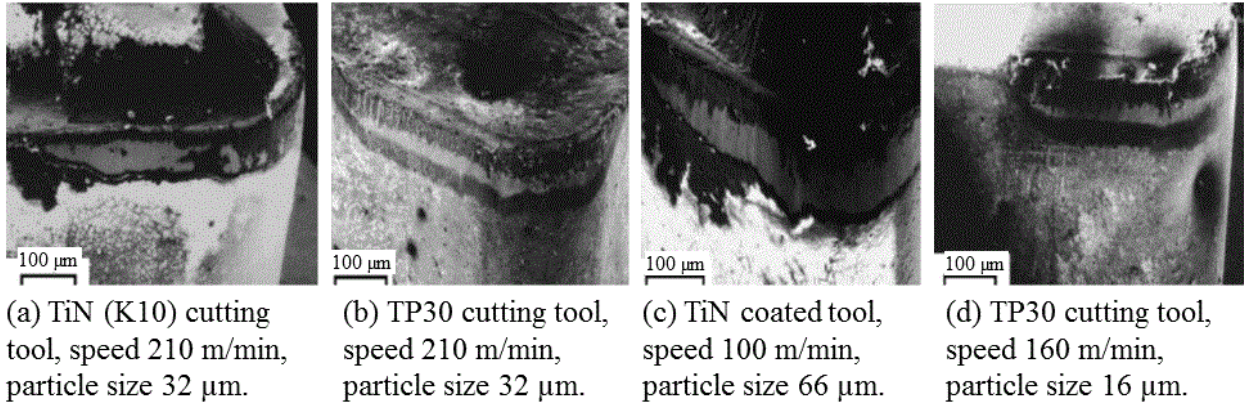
Flank wear of coated carbide cutting tools while machining of the 20 wt.%  $\text{Al}_2\text{O}_3$  particle-reinforced composites.
